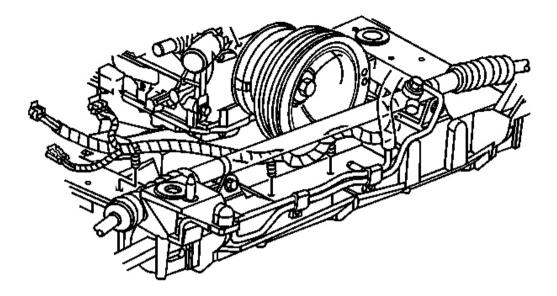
Electrical Harness & Brake Pipe Courtesy of GENERAL MOTORS CORP.
